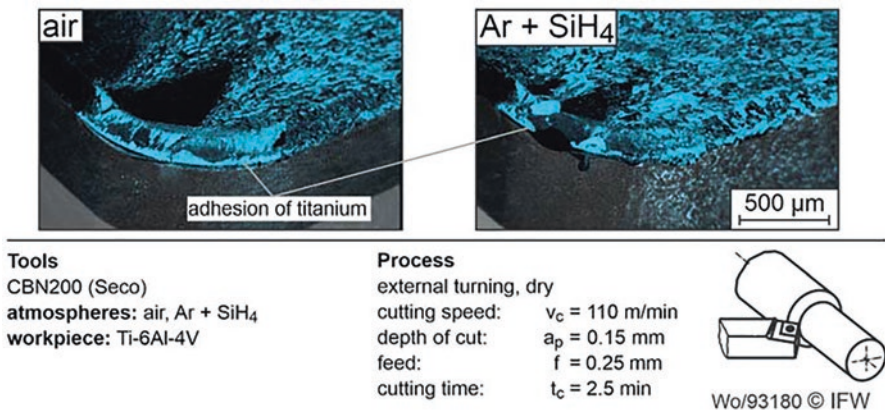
Element mapping on the rake face of CBN200 tools after 2.5 min cutting time; left: machining under air; right: machining und silane-doped argon
